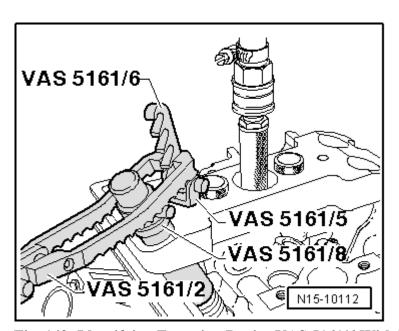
Identifying Engaging Device VAS 5161/6 With Installation Forks VAS 5161/5 Installed Into Guide Plate VAS 5161/19
